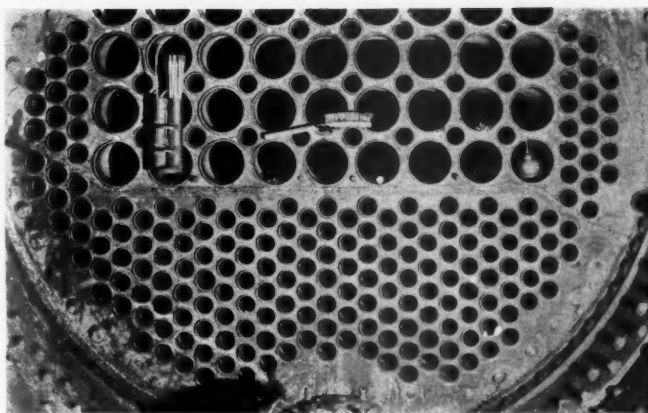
A  $\frac{3}{4}$ -in. front flue sheet welded-in without removing rivets
